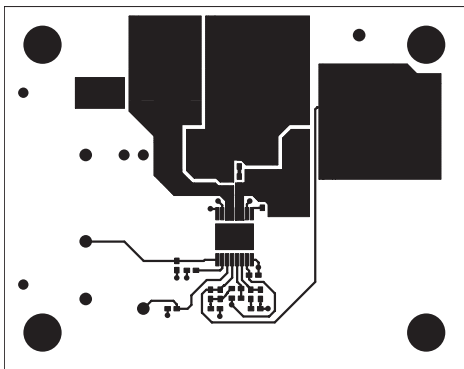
MAX16977 EV Kit PCB Layout—Component Side
